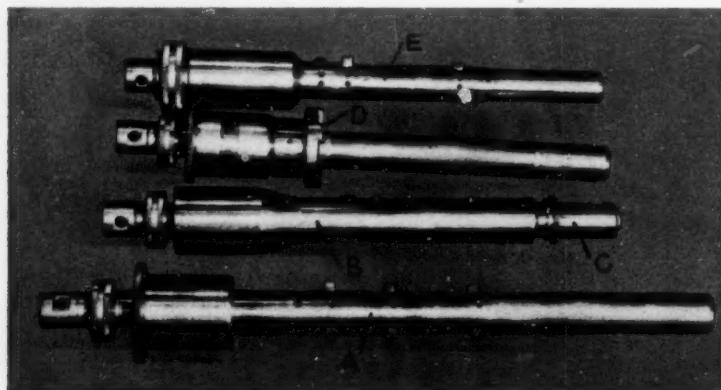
The Set of Tool Bars Employed for Boring and Facing the Spindle Bores of the Drum
